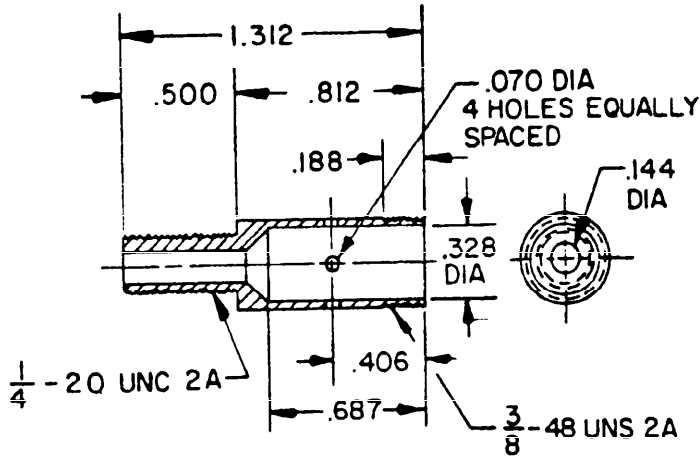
Outline drawing of electron tube type 726C - Continued.
